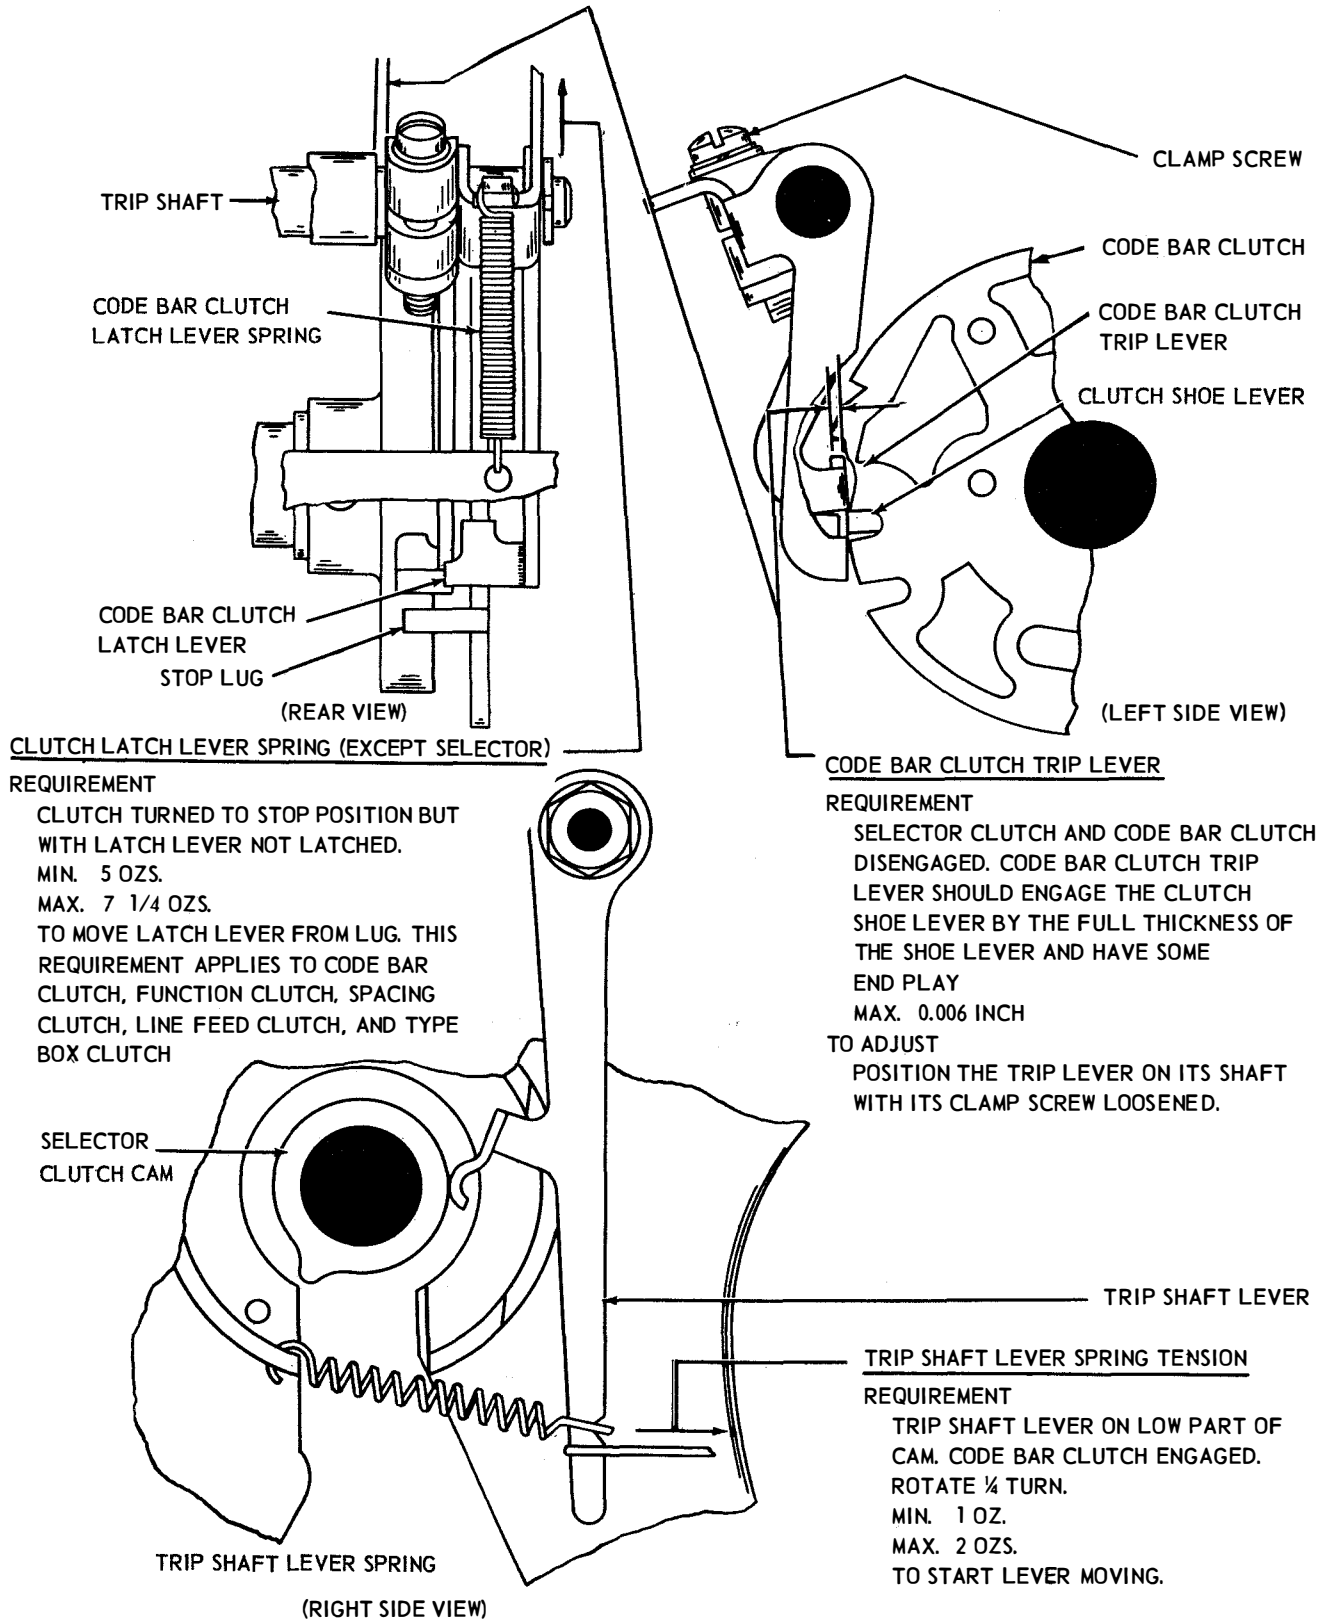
TYPYER, CODE BAR CLUTCH TRIP SHAFT MECHANISM
